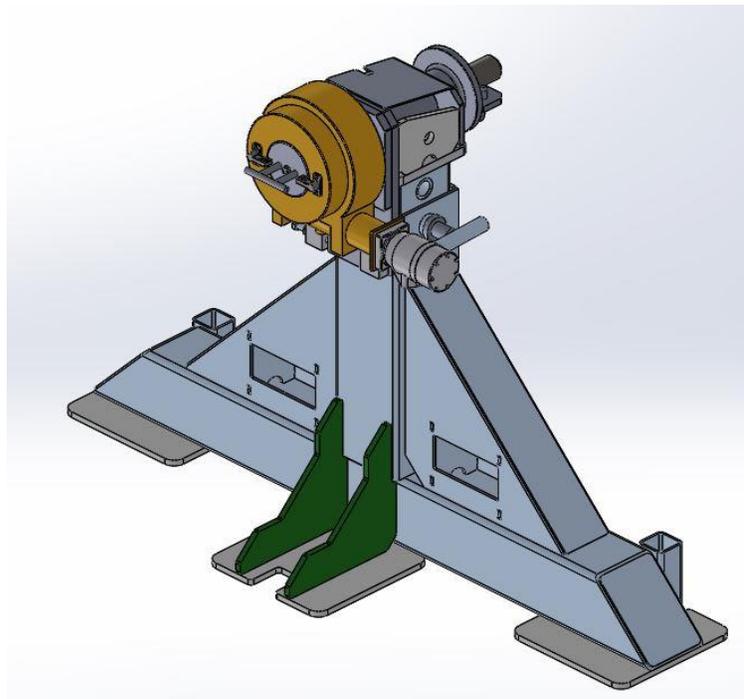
Final Design of Quick Change, Hydraulic Powered Drive End A-Stand, Outboard Side
